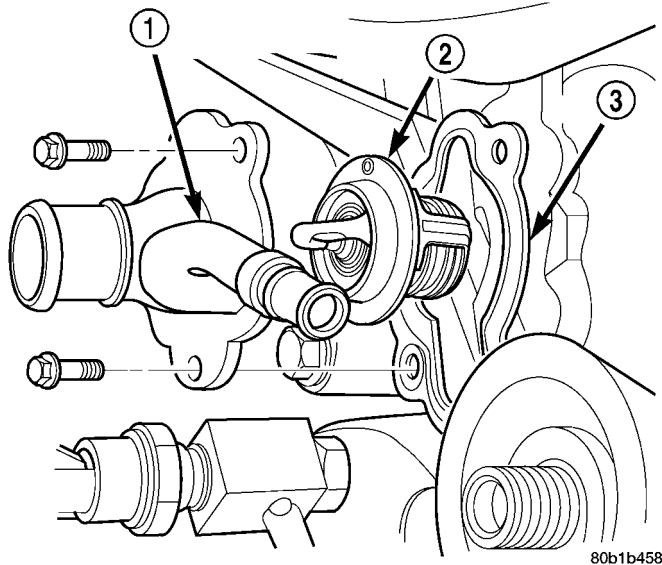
THERMOSTAT AND HOUSING - 2.7L
